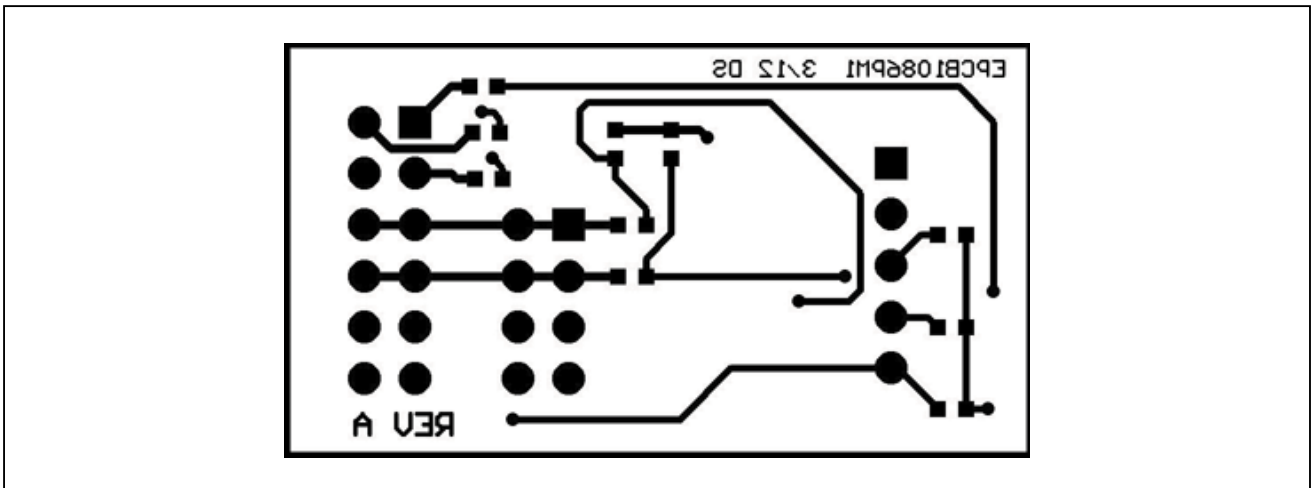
DS1086LPMB1 Peripheral Module PCB Layout—Solder Side
